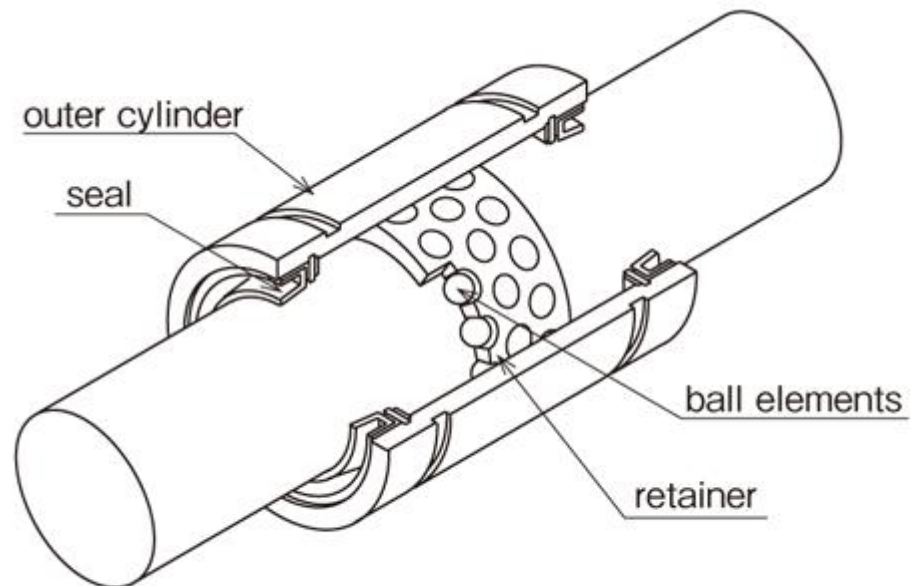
Nippon Bearing stroke bush bearing (NB Europe n.d.).
